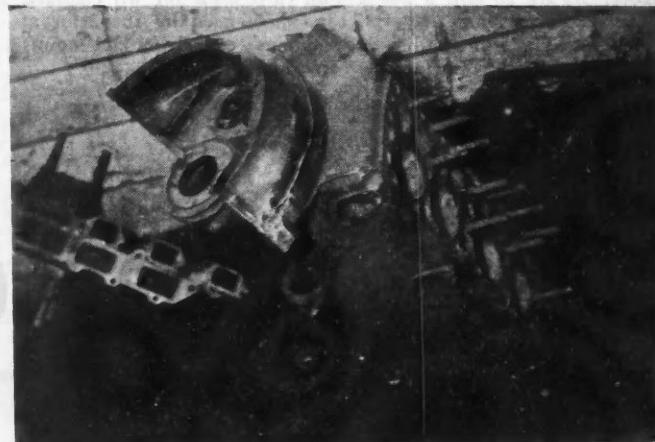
Nearly all types of breaks on flywheel housings are repaired by welding. Here a section from another unit is welded to a broken case. Engine blocks are reclaimed this way
